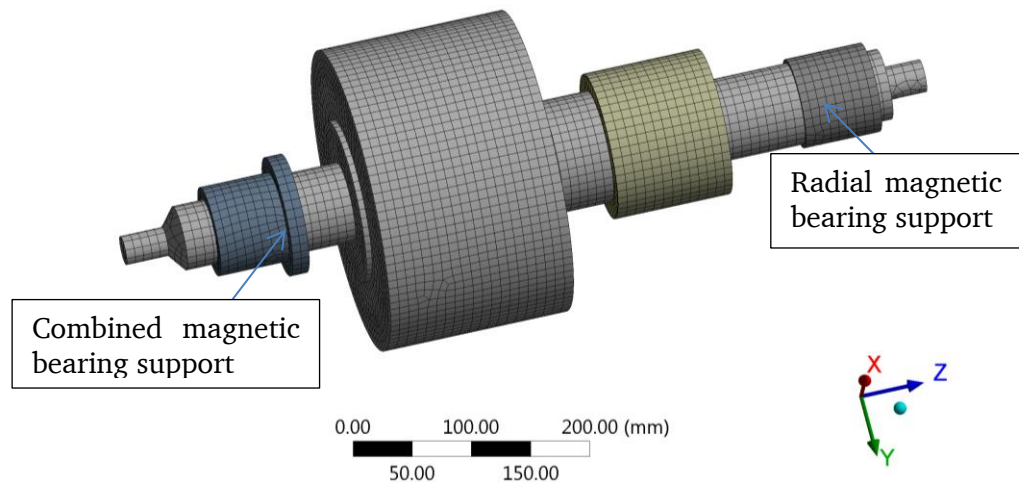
Modeled flywheel rotor with bearing support (characterized by the setting of stiffness and damping coefficient) and laminated rotor iron package in the E-machine and magnetic bearings, built in *ANSYS* for modal analysis
